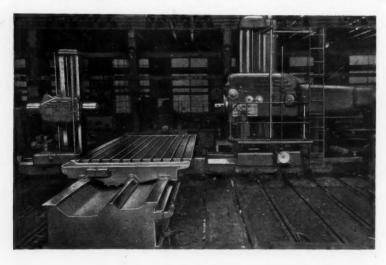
Of the Traversing-table Type, the Sverdlov LR6oC Boring Machine, Here Shown, has a Spindle of Approximately 6 in. Diameter, which can be run at 1,000 r.p.m., and Incorporates an Amplidyne-drive for the Feed Motions
